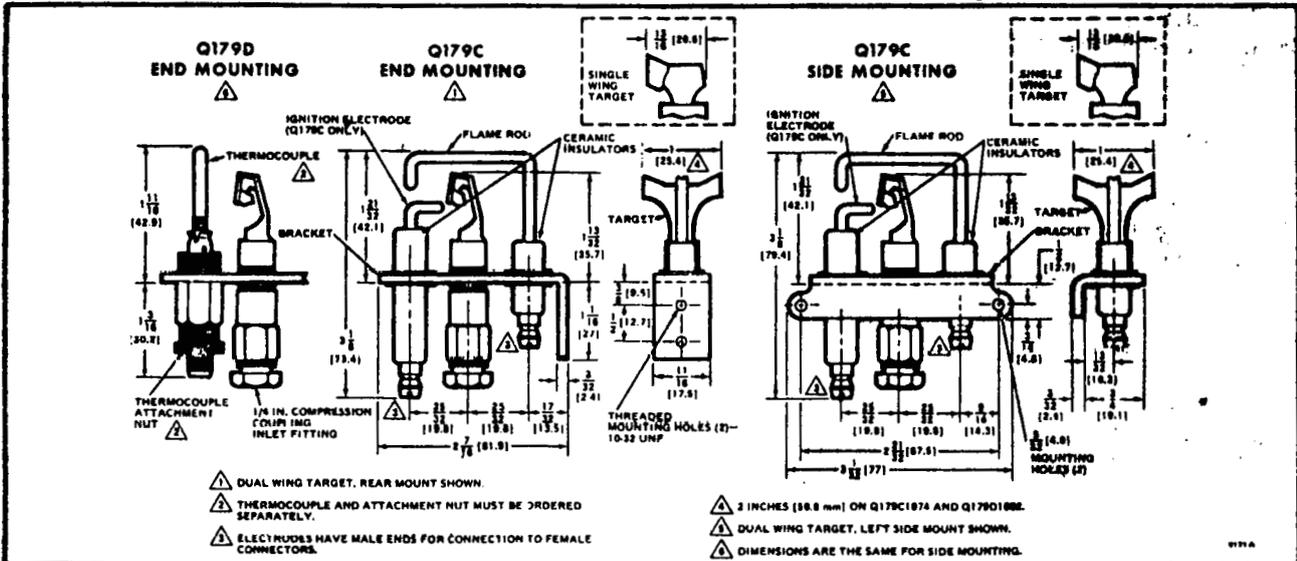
APPROXIMATE MOUNTING DIMENSIONS, IN INCHES [MILLIMETRES IN BRACKETS], AND ARRANGEMENT OF PARTS.
